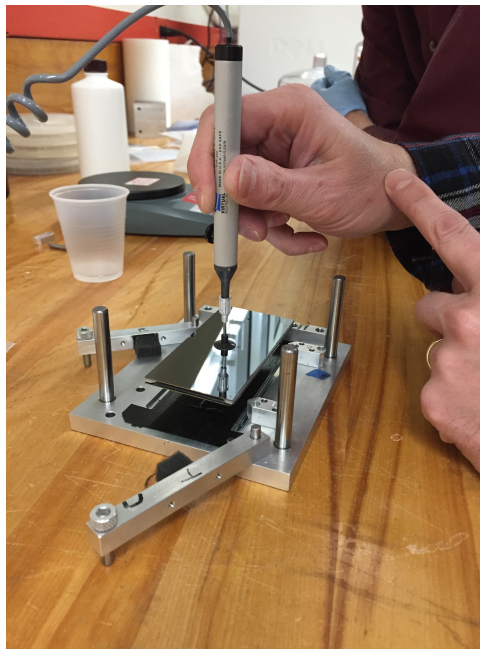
Photo of the PS module jig being used to glue the PS sensor assembly to the CFRP baseplate.
